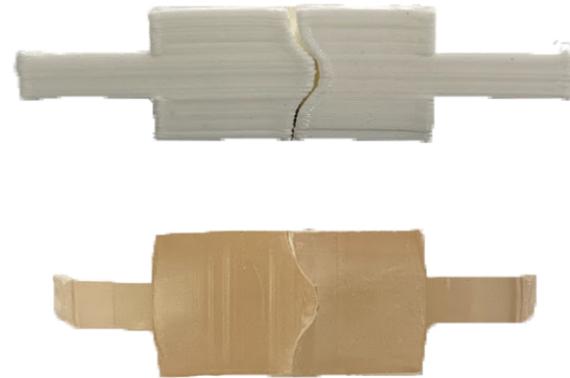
Top: layered FDM printed interlocking form. Bottom: Higher accuracy SLA printed interlocking form.
